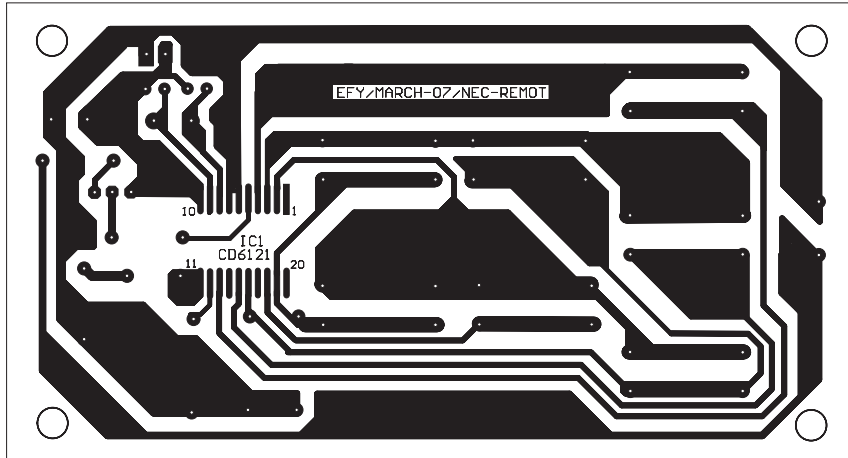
Actual-size, single-side PCB layout for remote control digital audio processor
